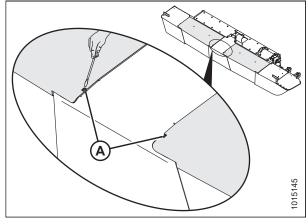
Cutterbar Door Latch Access Hole – Export Only
